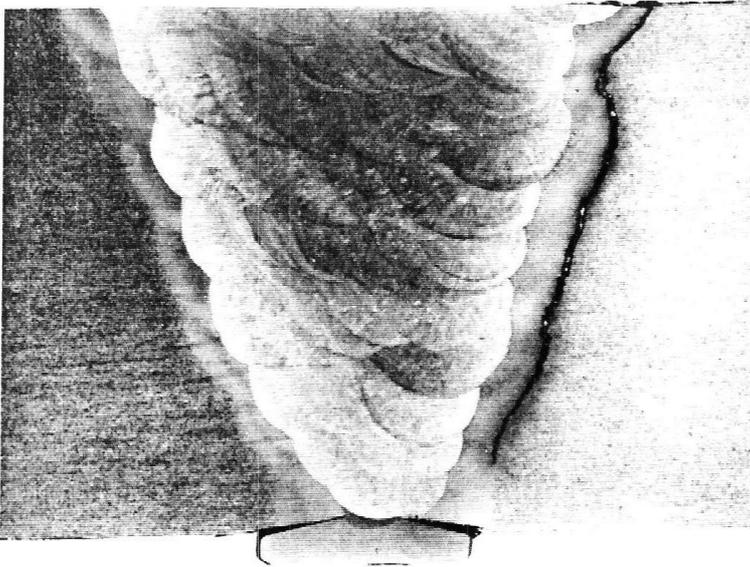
Example Type IV crack a CMV weldment:-
